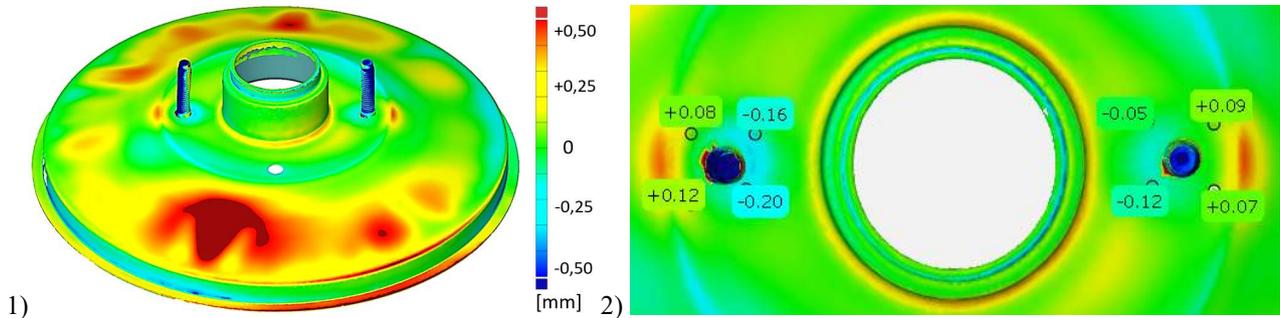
Results obtained in step 2 – Final phase. 1) Color gradient; 2) Crimping region detail.
